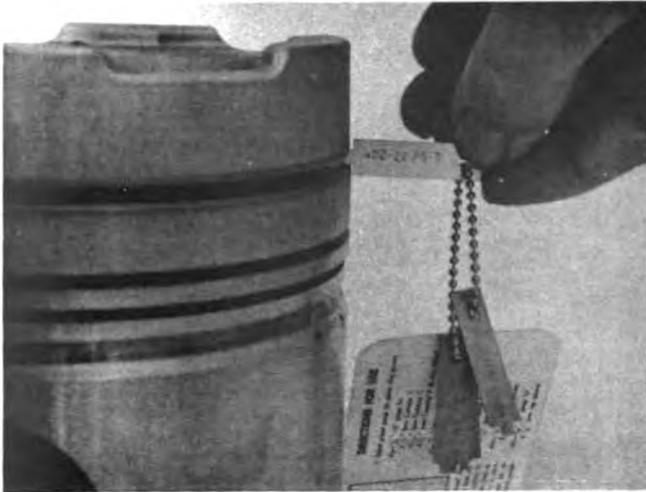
(N10142). Check For Wear In The Ring Groove.
